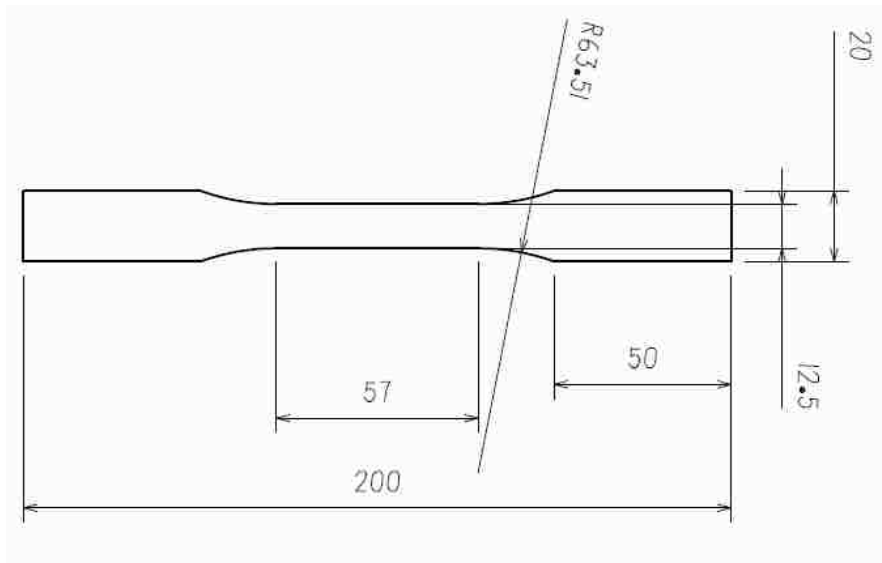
ASTM E8 specimen geometry [10] (dimensions in mm)
